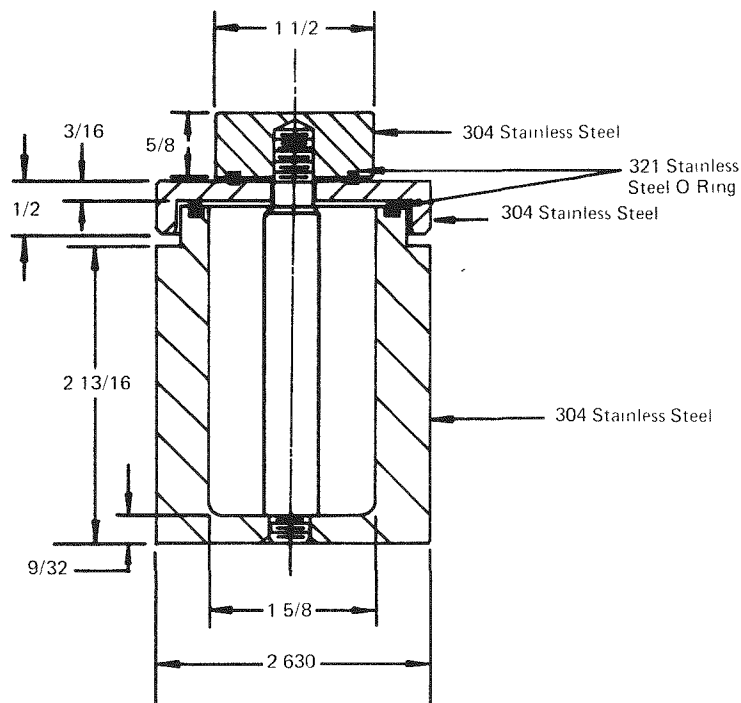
Plutonium powder storage and shipping capsule (dimensions in inches).
